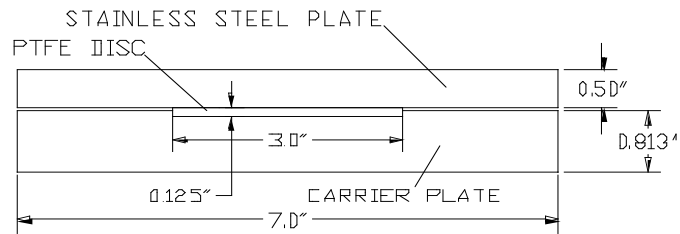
Specimen set: PTFE carrier, PTFE disc, and stainless steel plate.
